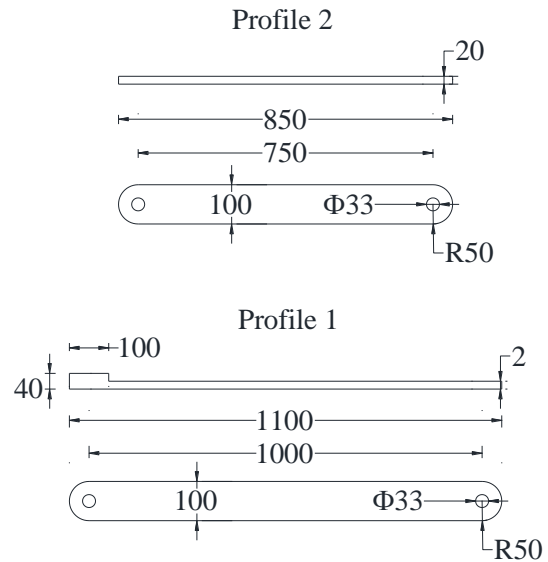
Geometrical configuration of the steel profiles (dimensions are expressed in mm)
